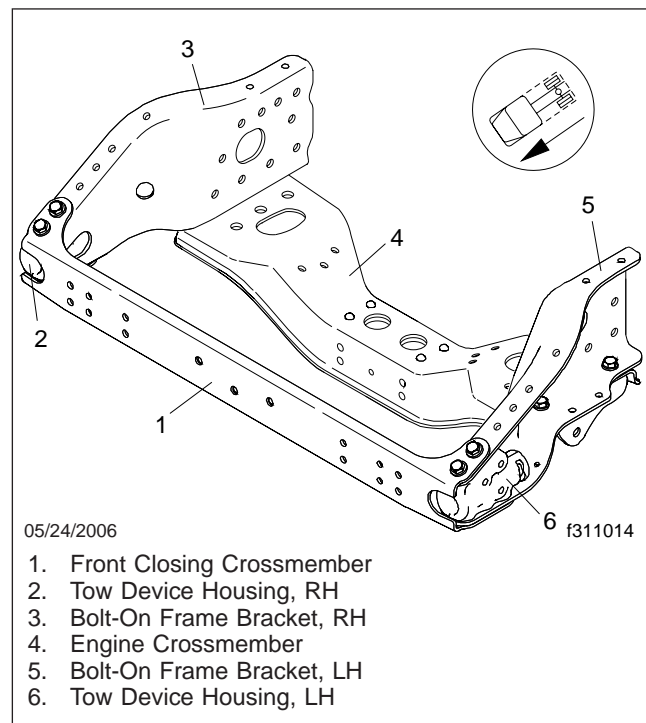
, Bolt-On Front Frame and Front Closing Crossmember
